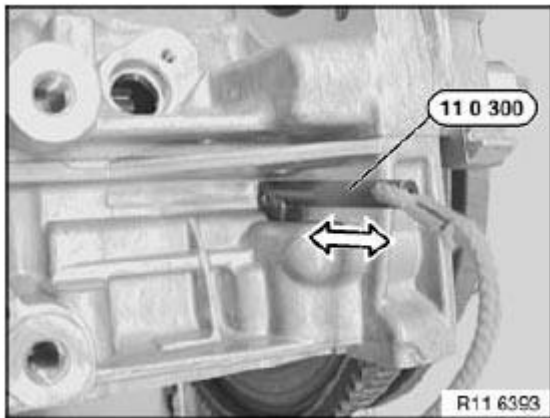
Securing Flywheel In Position Using Special Tool 11 0 300
